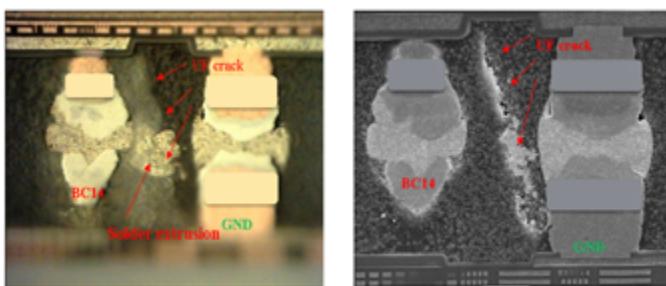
The first cut using PFA revealed the solder extrusion, but not the bump-to-bump connection, requiring further cutting and polishing.
